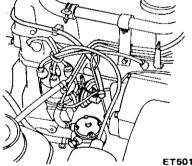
Disconnecting Distributor Vacuum Hose
